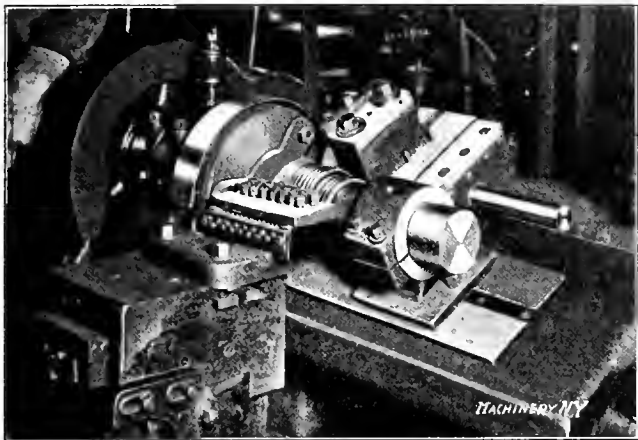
Turning, Boring and Cutting-off Piston Rings in a Gridley Machine
